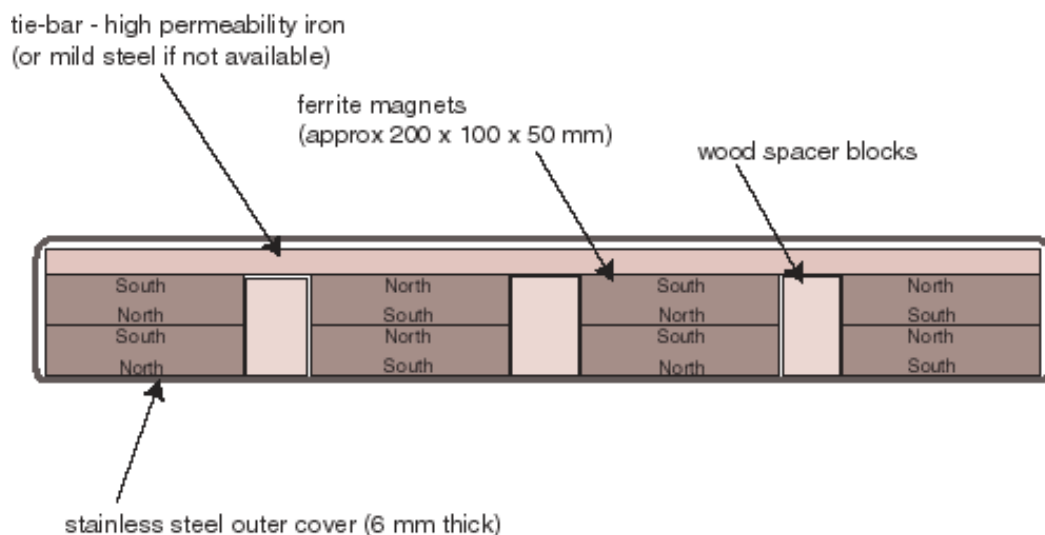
Magnet assembly used for trial consisted of 8 ferrite slab magnets mounted in a 6 mm thick stainless steel case.
